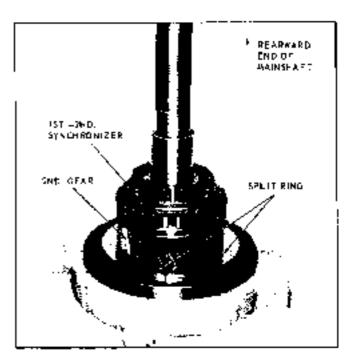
C-12 Removing 1st and 2nd Synchronizer and Second Gear
